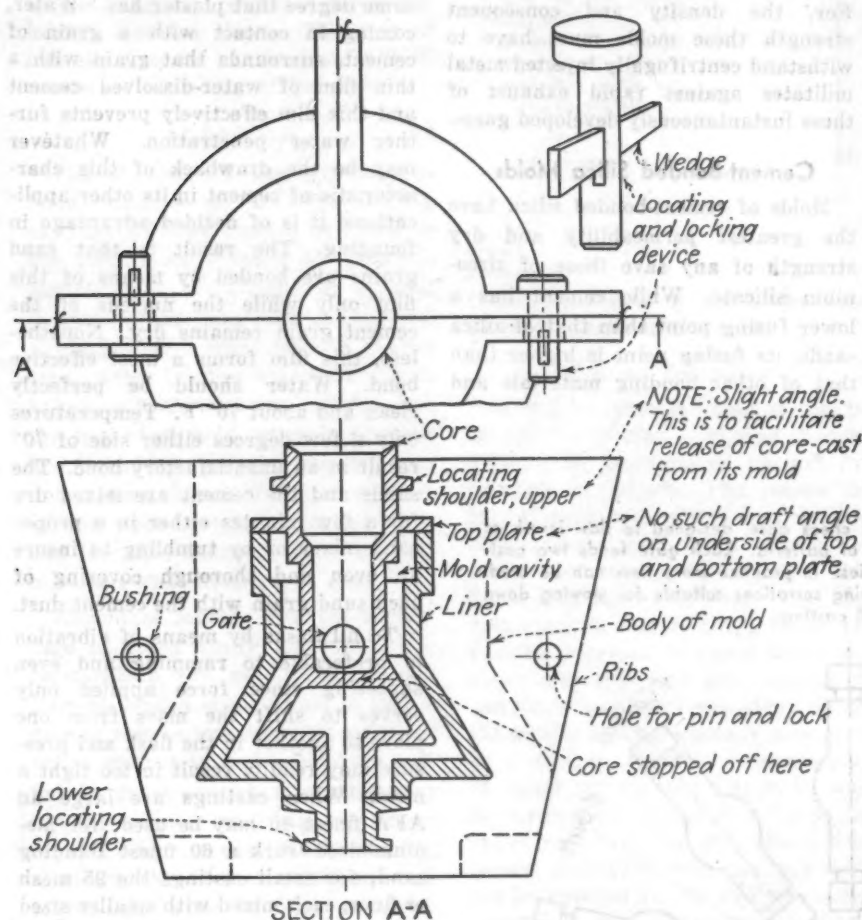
Liner and core in permanent mold for casting steel. Liners (in two halves) after baking and firing are inserted into split steel mold. Core is made in one piece.
